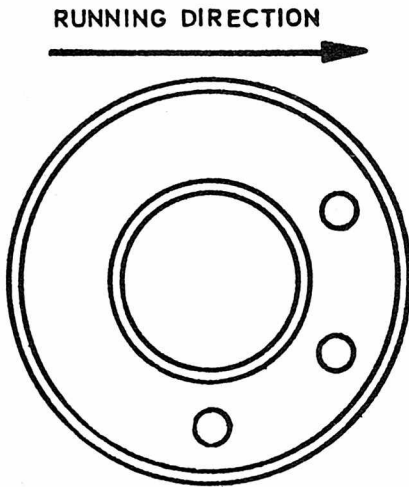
Motor mount blocks (14-Fig. LM1-9) on late models, are provided with three dampening holes as shown. Blocks should be assembled with one hole directly at the bottom and others toward front.
